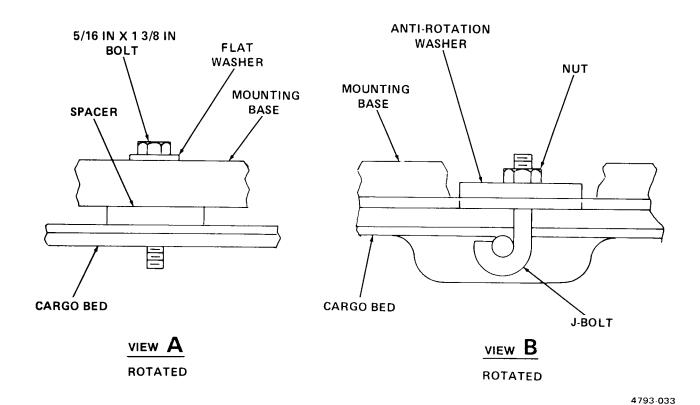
Mounting Base Installation (Sheet 2 of 2)
